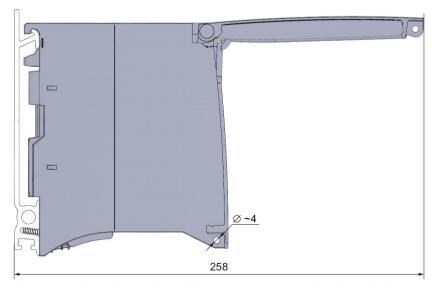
Dimension drawing of the CPU 1517H-3 PN, side view with front panel open
